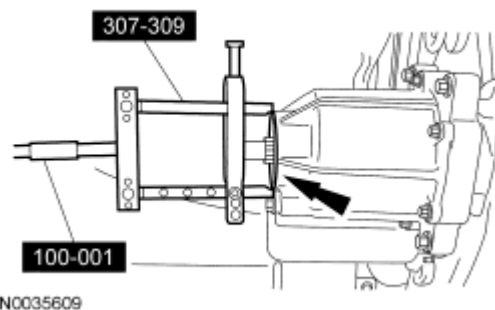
Removing Drive Pinion Seal Using Special Tools (307-309, 100-001)
